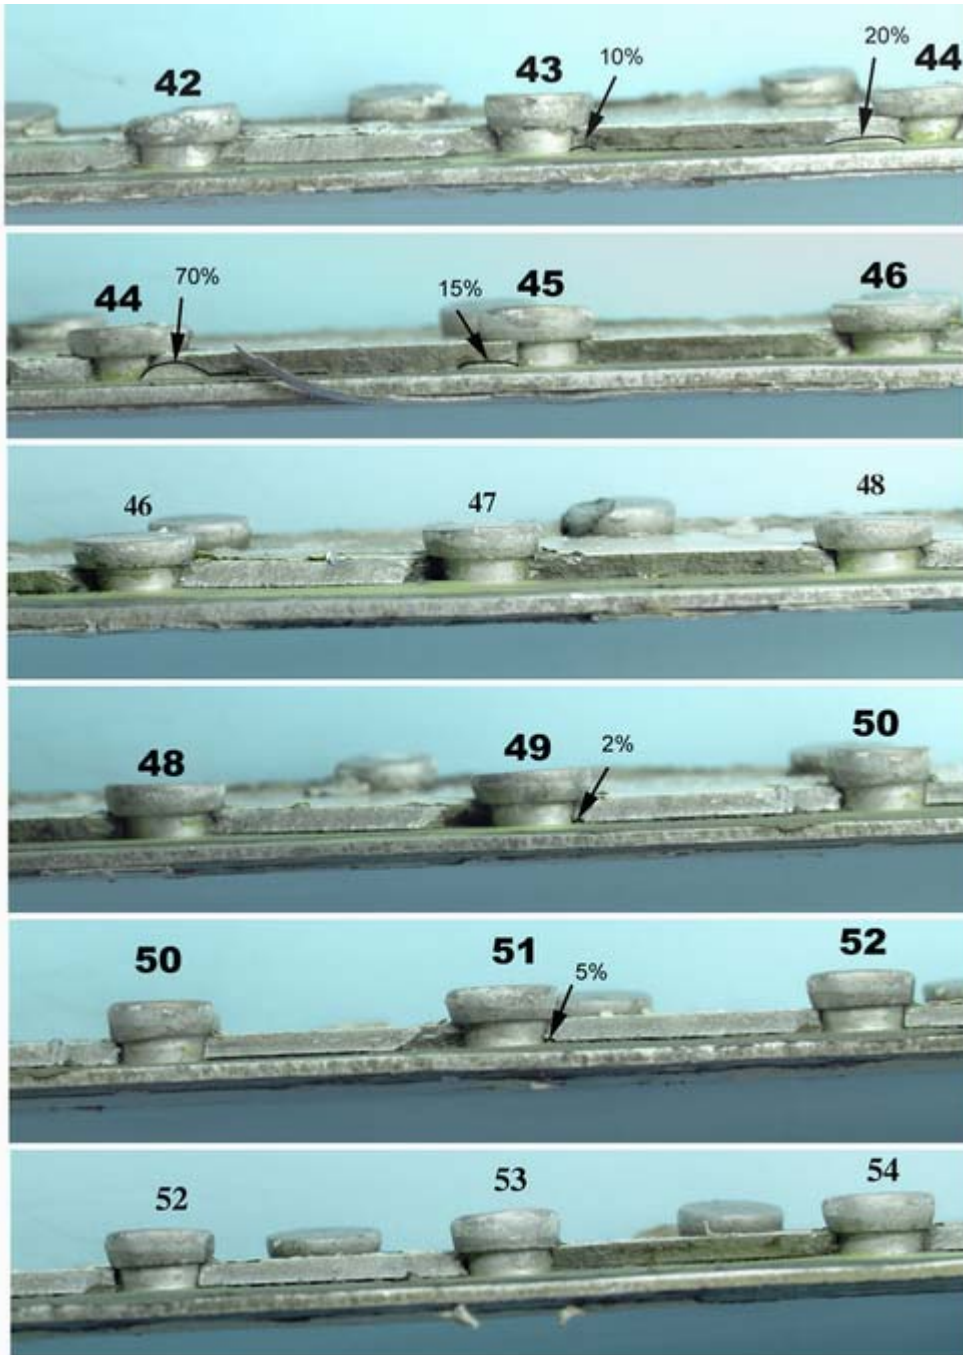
Shown the extent of fatigue cracking
